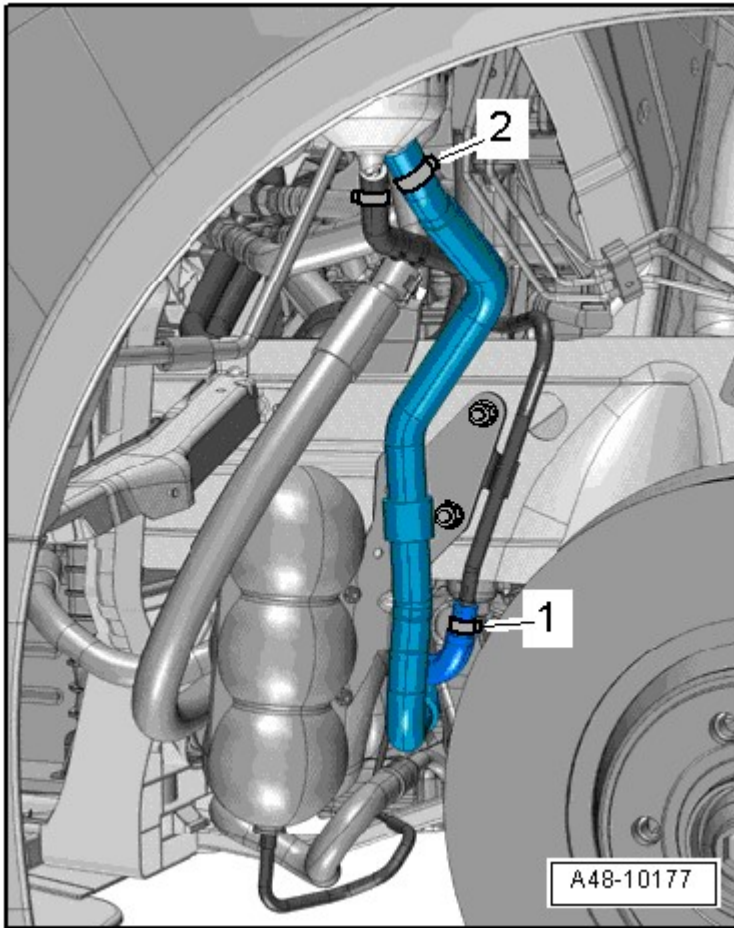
Identifying Power Steering Hydraulic Oil Feed Line -2- & Return Line -1-
